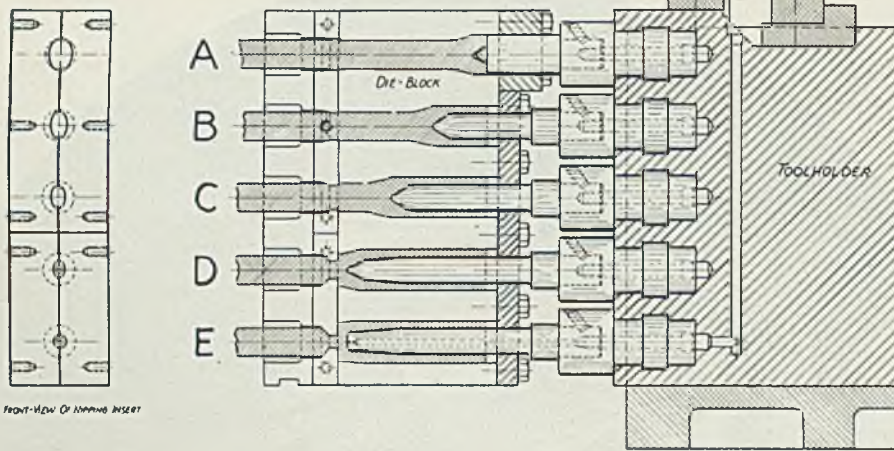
(Top)—This shows looking and also shape of the metal in progressive steps in the forging of a 75-millimeter shell by the displacement piercing method using an upsetting forging machine. The completed forging will be half of a double ended forging. Similar setups can be made to use long billets from which shell body is nipped off at last forging stage. Of course, shell bodies are not in all stations of the machine at once as shown here but a single body is worked in each stage in succession from the top to the bottom positions
